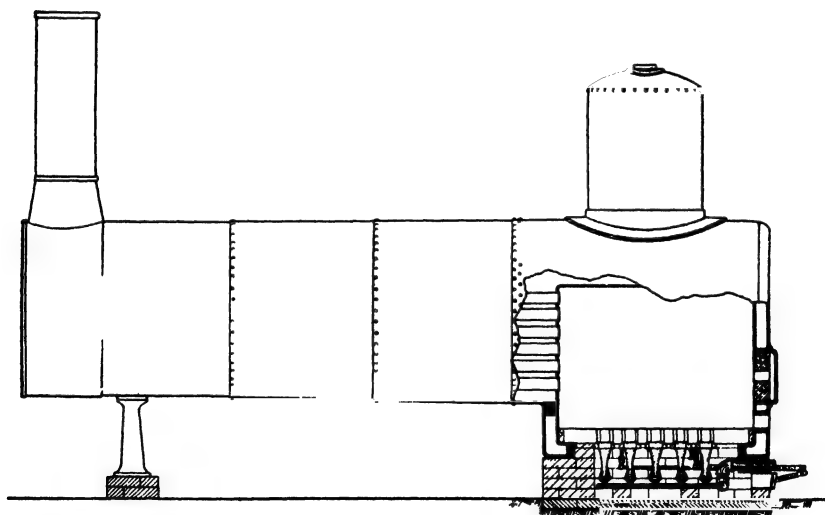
Oilfield or locomotive-type boiler (Courtesy of Webster Engineering Company.)
